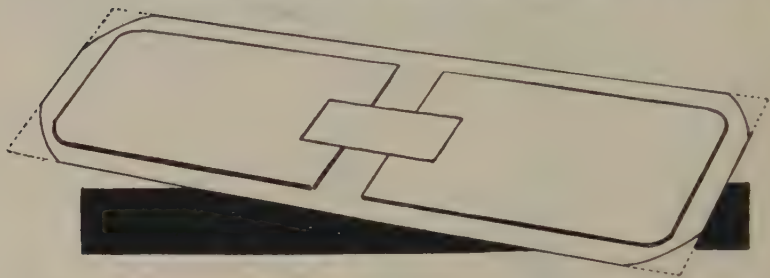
MAKING PATTERN FOR CUTTING LEATHER FOR COVER
